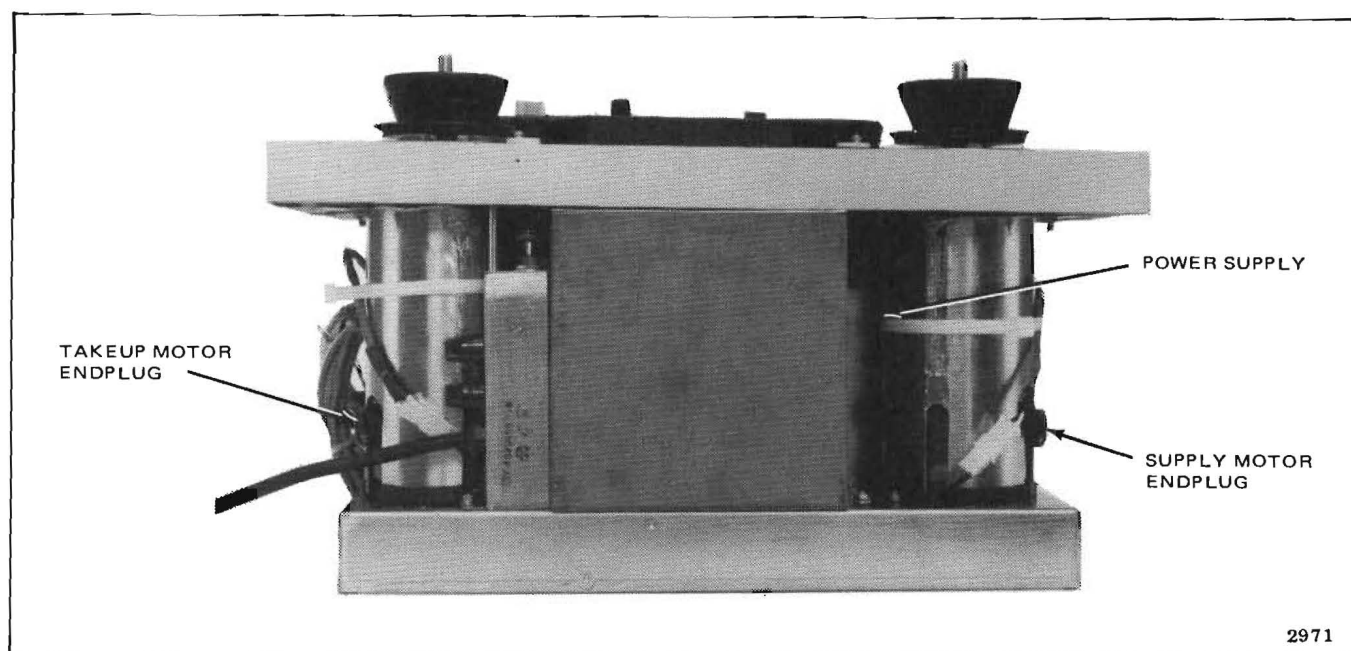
Reel Drive Motor Brush Replacement, Rear Side View of Transport
